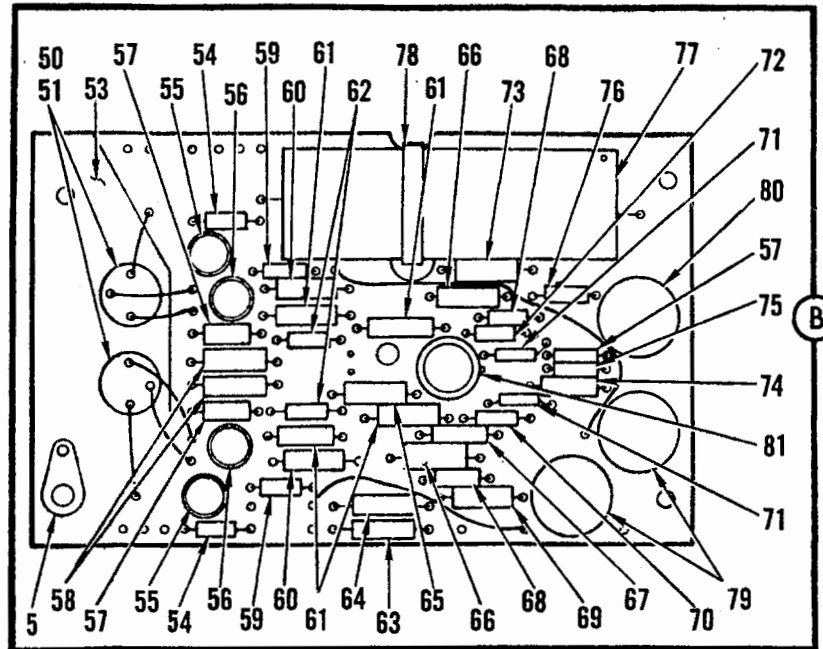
Yaw Damper Amplifier - Exploded View (Sheet 1 of 2)
